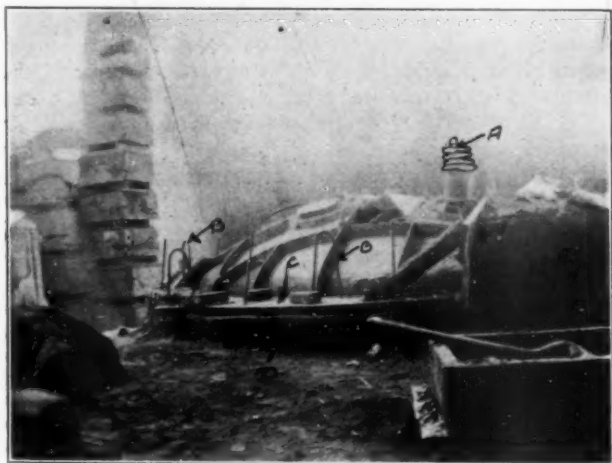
VIEW OF MOLD OF CONDENSER COVER.
